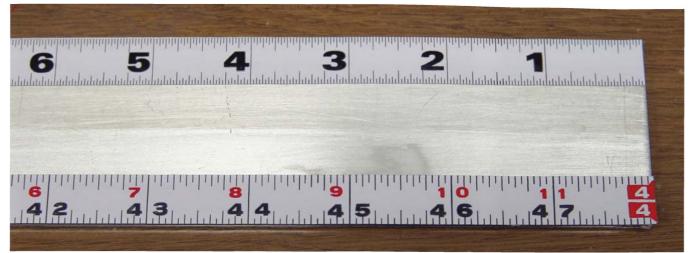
Here you see what used to be the blank, backside of my 48" measuring stick. Using stick-on measuring tapes, however, I converted the useless blank side into a useful tool.
